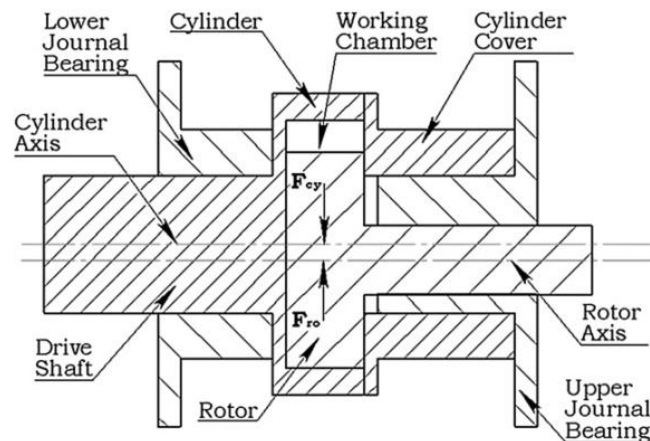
Improved Revolving Vane Journal Bearing Design [21]
